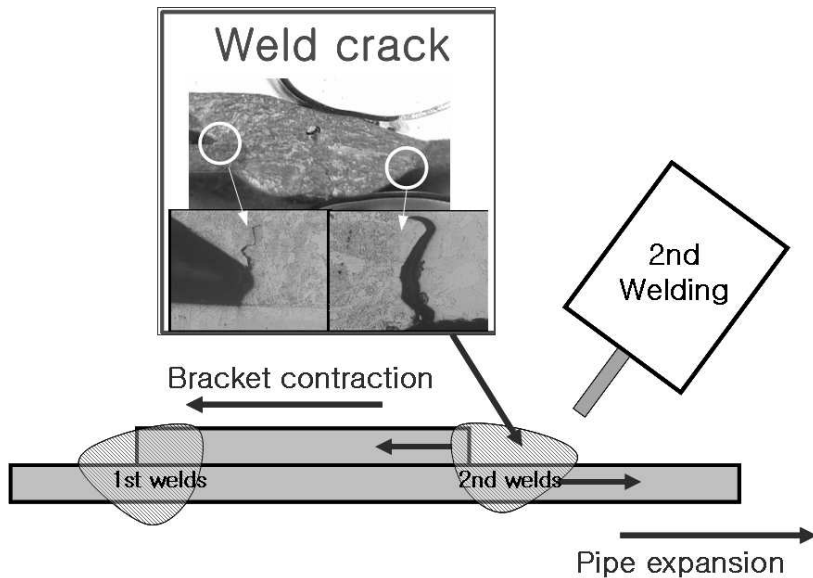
Hot crack appeared due to tensile strain in 2nd welds
